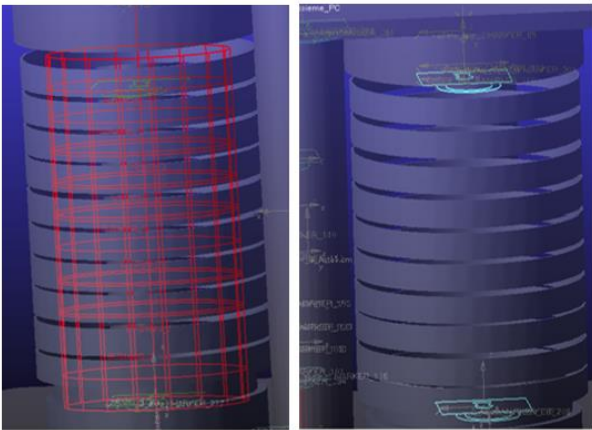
BUSHING ELEMENTS AND FIXED JOINTS
